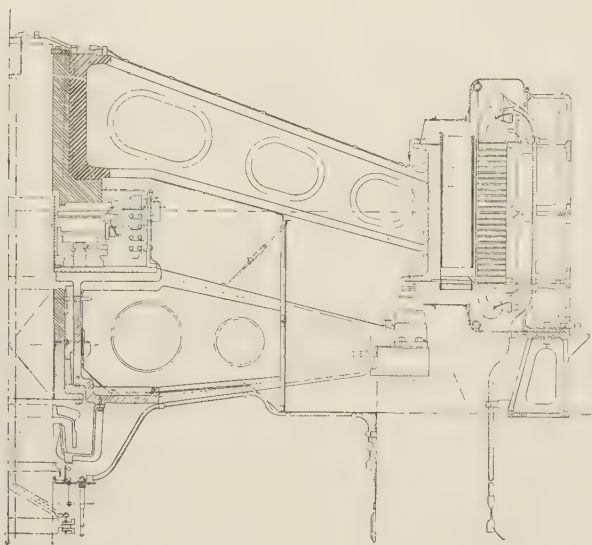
SECTION OF 27,500-KV-A., 90-REV. PER MIN. VERTICAL-SHAFT ALTERNATOR WITH OVERHUNG ROTOR
